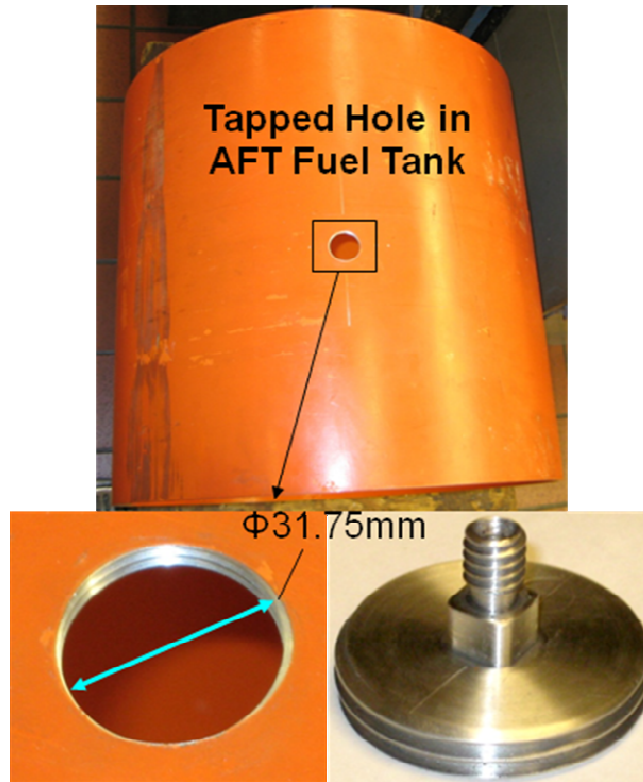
The corrosion pit on tank wall is replaced by a machine and tapped hole of diameter 31.75mm. A plug which threads into the hole is also shown.
